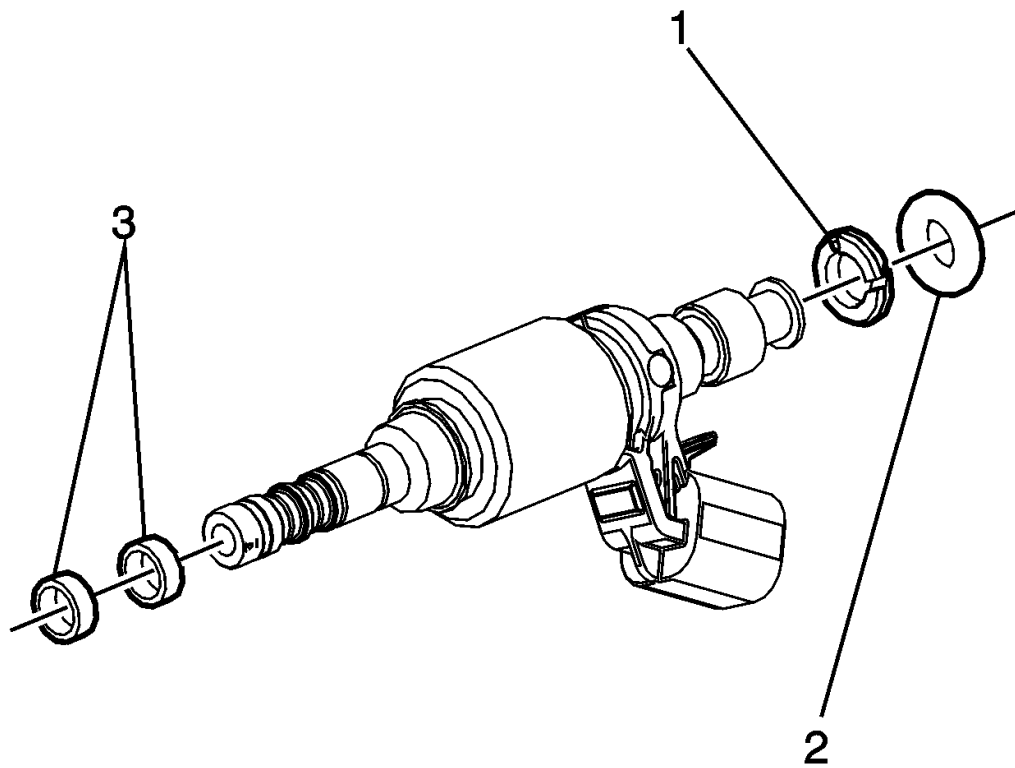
Fuel Injector O-ring And Plastic Spacer
